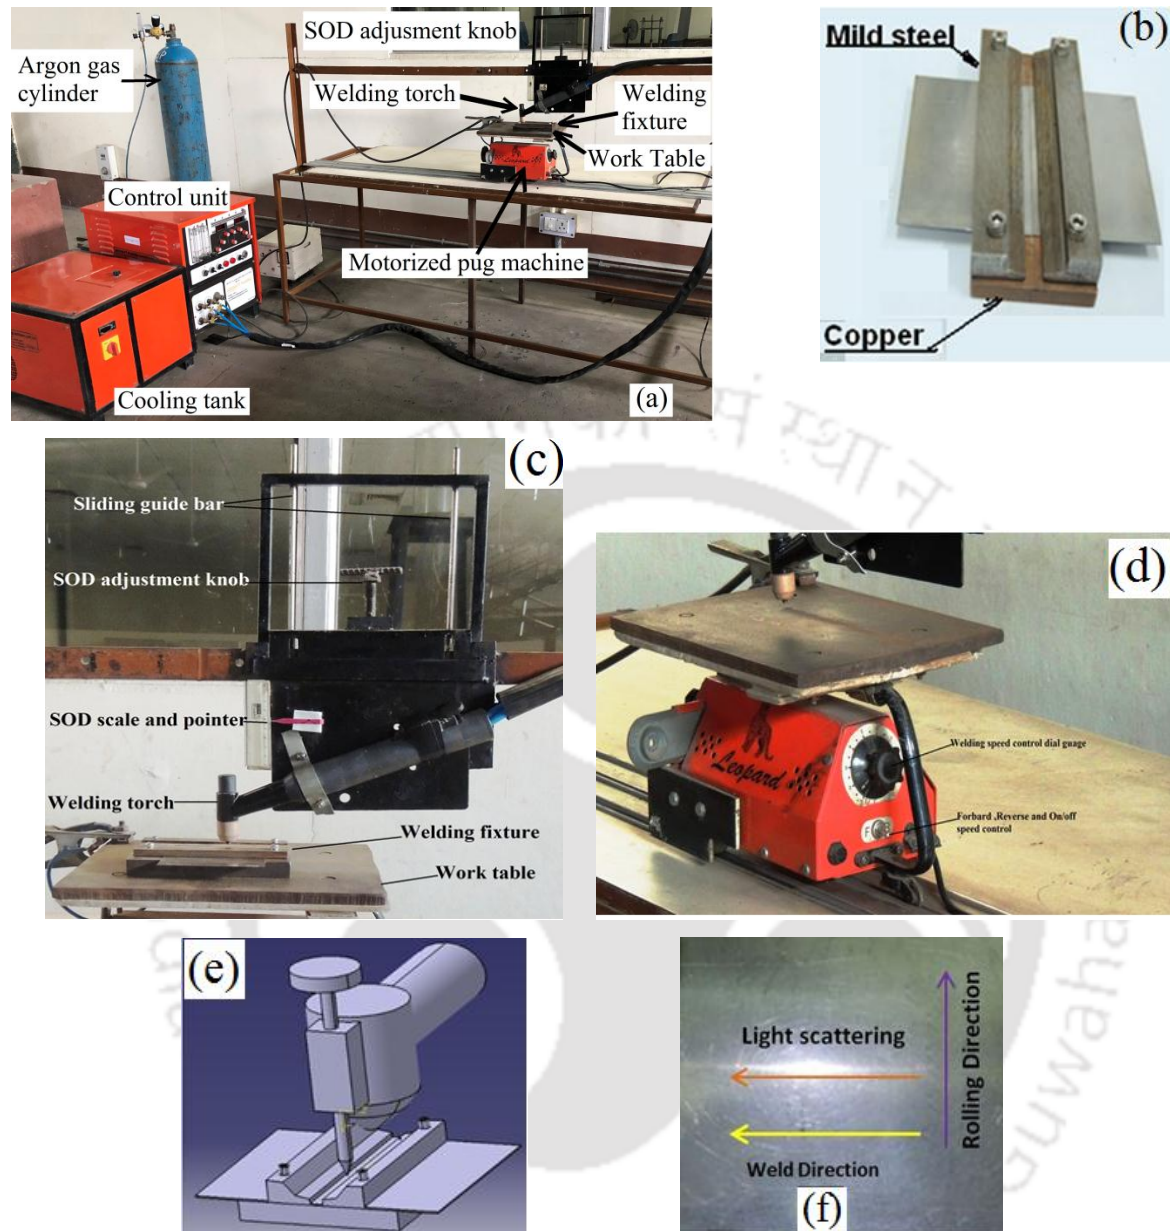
(a) Complete MPAW setup (b) workpiece holding fixture (c) welding torch holder to set desire stand-off distance (d) motor driven welding platform (e) setup for weld line adjustment and (f) detection of rolling direction.
